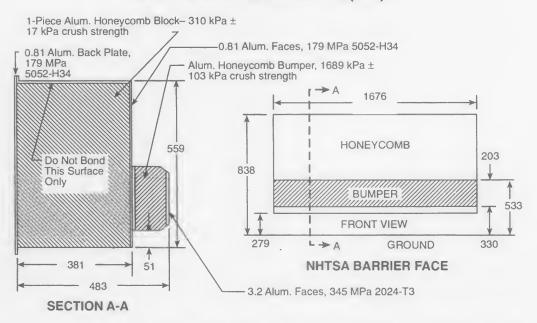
NHTSA SIDE IMPACTOR – MOVING DEFORMABLE BARRIER All dimensions in millimeters (mm)
